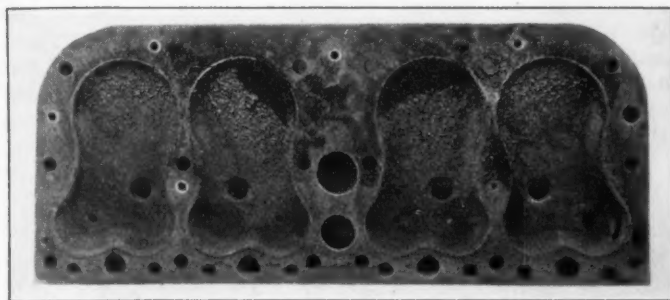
A TYPICAL CYLINDER-HEAD SHOWING THE CARBON DEPOSIT IN A TRACTOR ENGINE
